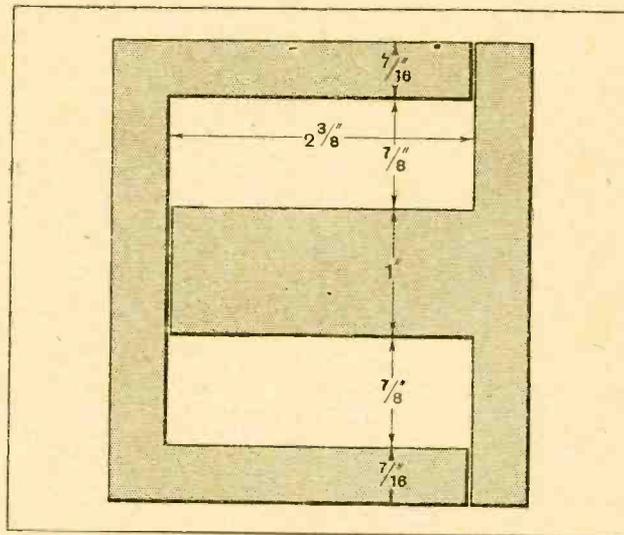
Showing the dimensions of standard Stalloy stamping No. 4.
